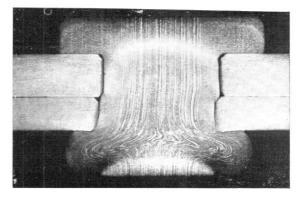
Example of a well-formed rivet which conforms to the conditions specified in the text.
